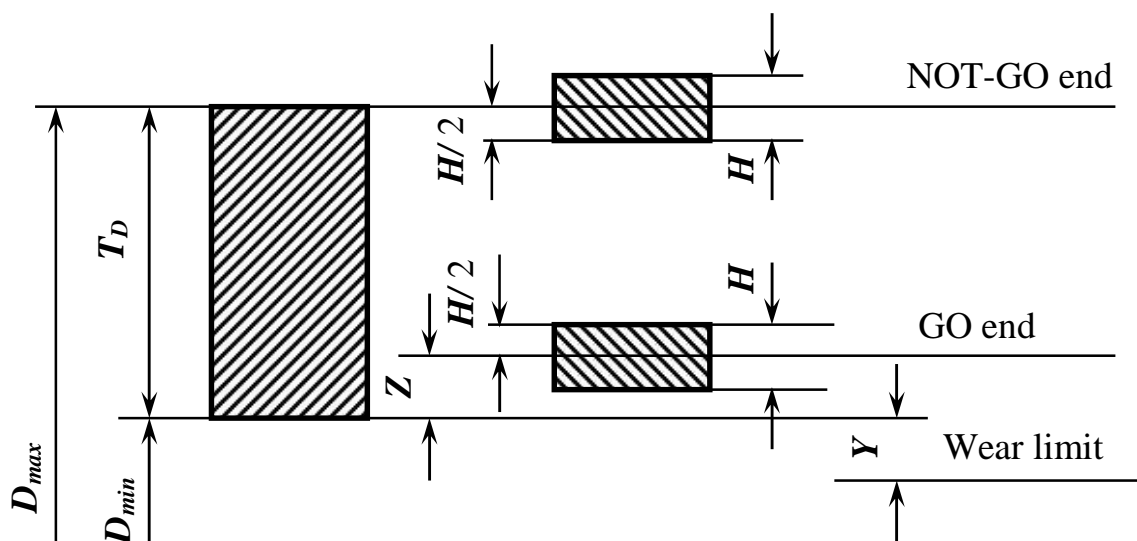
Tolerance bands of gauges for hole part
